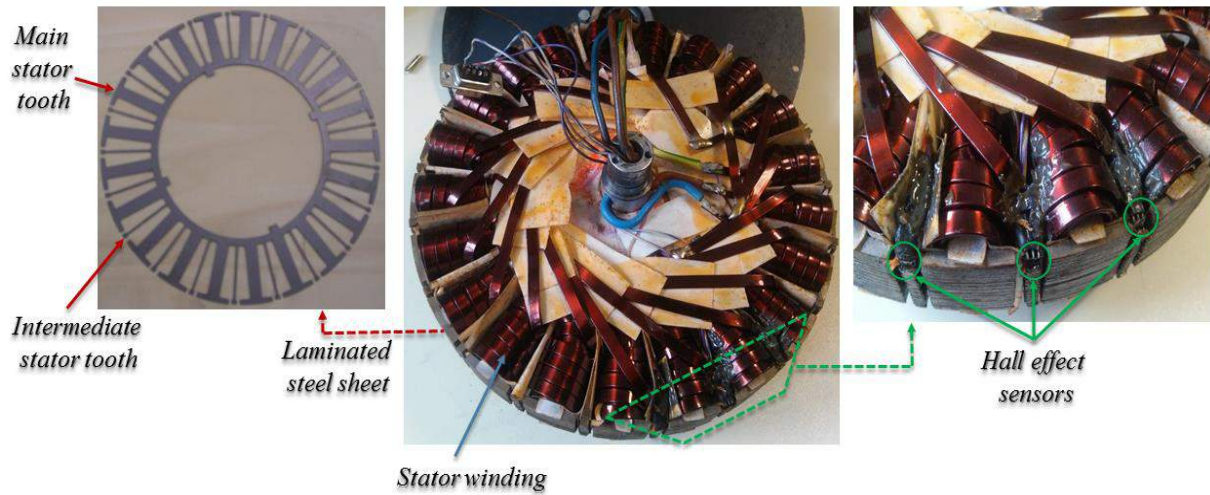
Stator part configuration of the BLDCPM prototype machine
